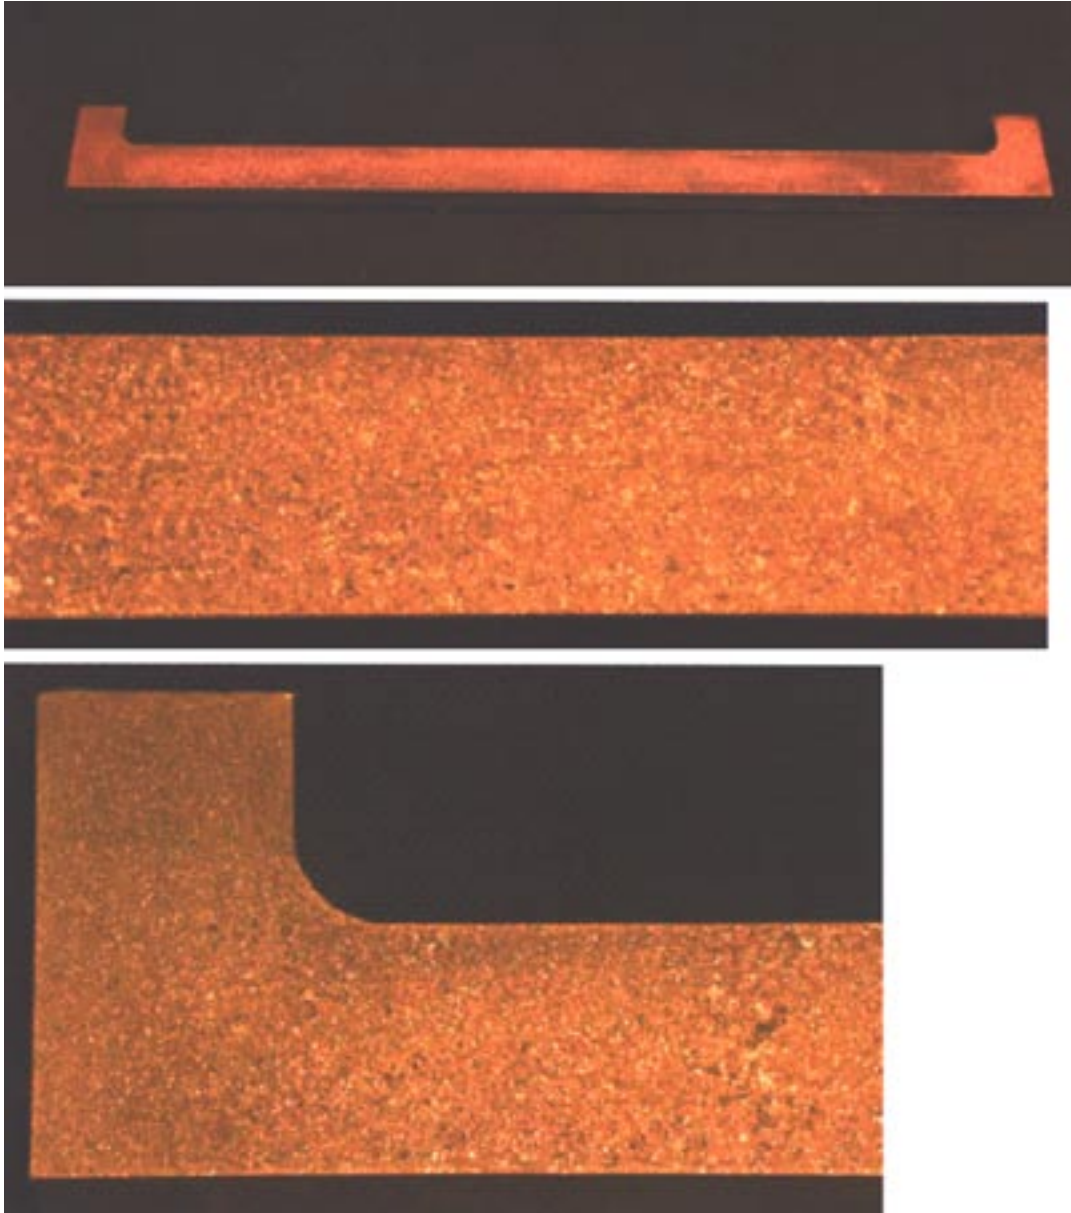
The microstructure in a diametrically cut-out cross-section through the bottom of tube T 36.
